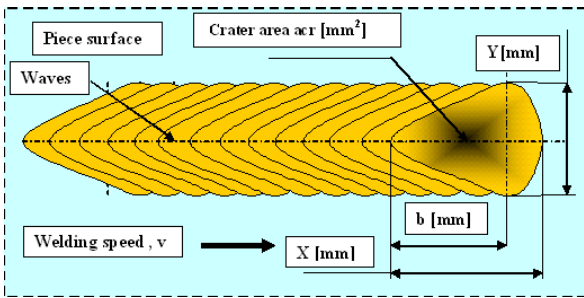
Scheme weld surface with crater obtained at the end of the weld
